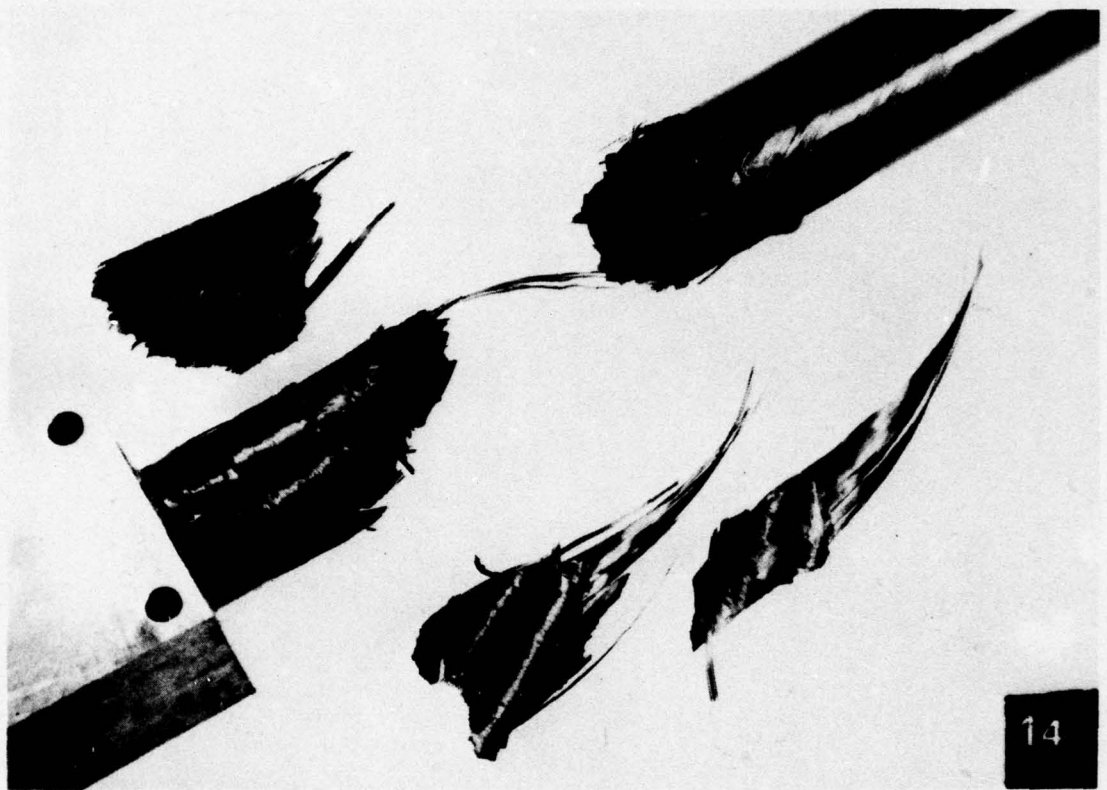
MATERIAL FAILURE (OF EXPLOSIVE TYPE) IN 12-LAYER + 30°/- 30°/90° TUBE
